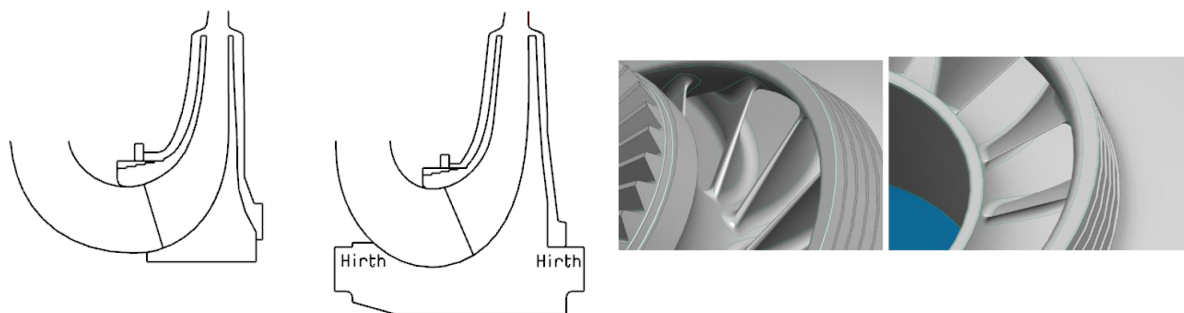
2D view of standard design and T52 HPRC impeller [12] (© 2025 Baker Hughes Company - All rights reserved)
